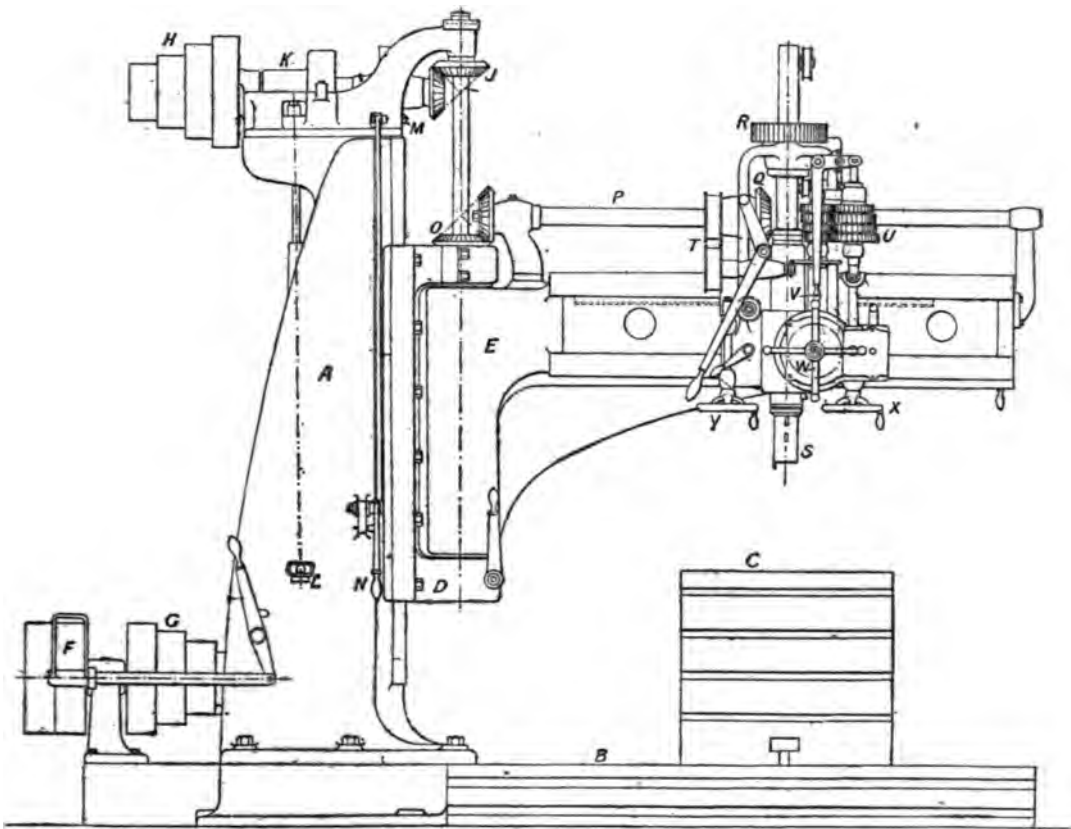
Radial Drilling Machine. (Tangyes, Ltd.)
